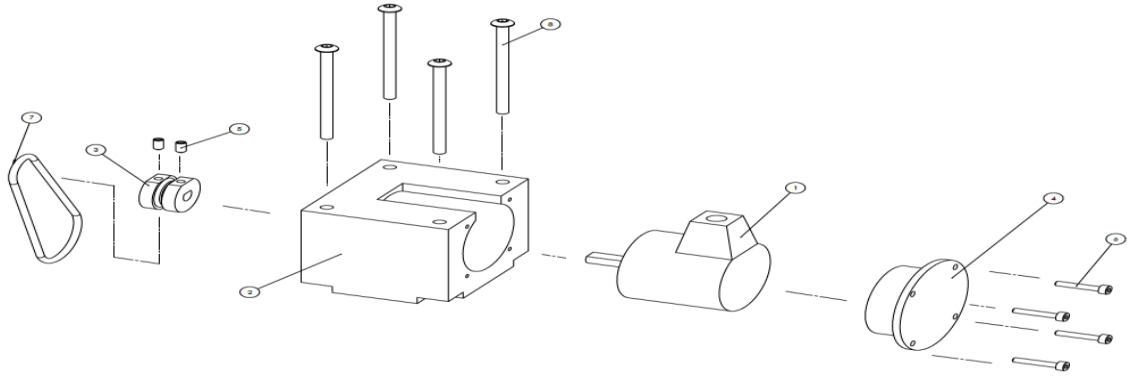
Exploded view of the encoder subassembly. 1: encoder; 2: encoder holder; 3: plug which fits in the encoder spindle; 4: encoder holder lid; 5: screws to fix the plug; 6: screws to fix the encoder lid; 7: o-ring; 8: screws to fix the encoder holder.
